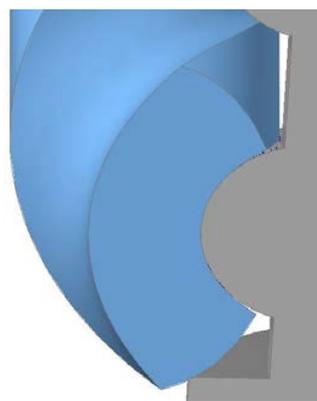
Visualization of the contact of surfaces of the detail and the tool in the axial section of the detail.
